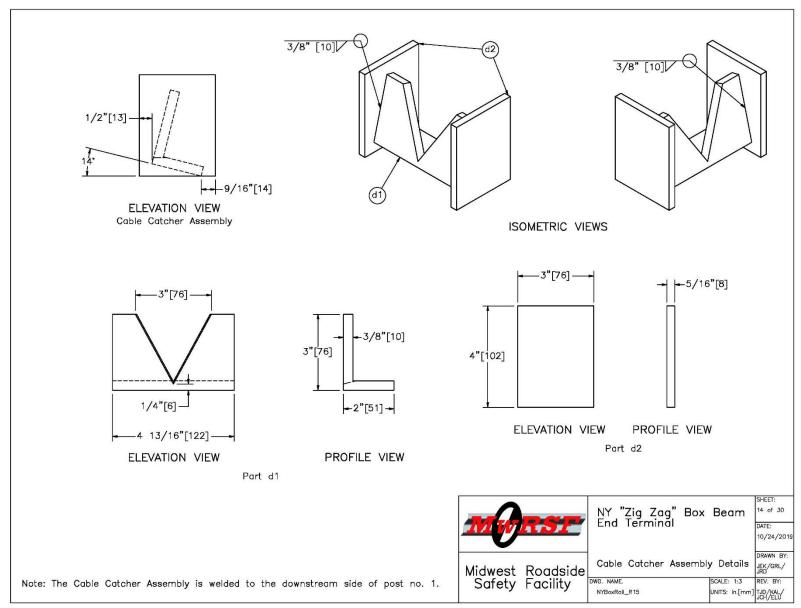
Cable Catcher Assembly Details, Test No. NYT-1
